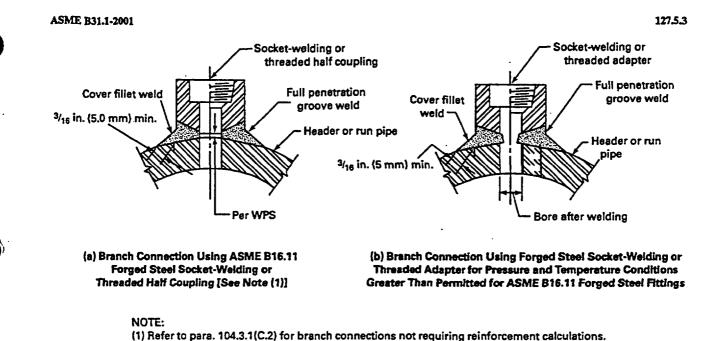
(E) TYPICAL FULL PENETRATION WELD BRANCH CONNECTIONS FOR NPS 3 AND SMALLER HALF COUPLINGS OR ADAPTERS
